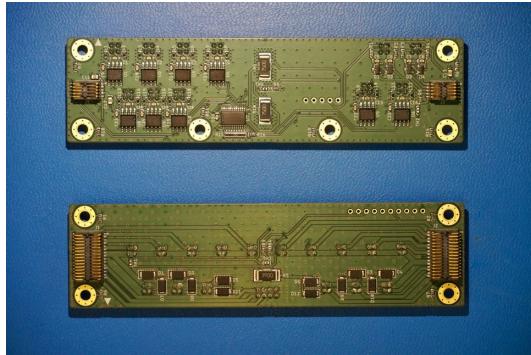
Layout of Controller: Sensor Connect Board (Top), Driver Connect Board (Bottom)
